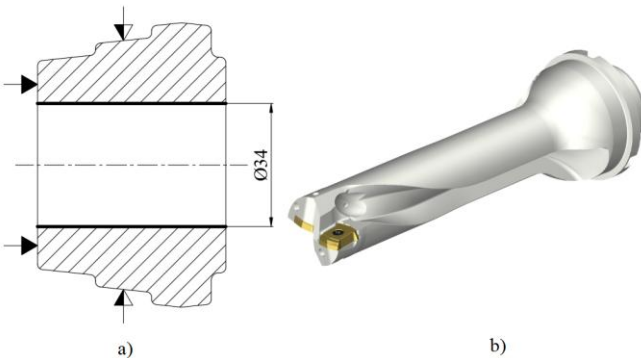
(a) First pass, (b) Straight - flute drill that uses indexable inserts
